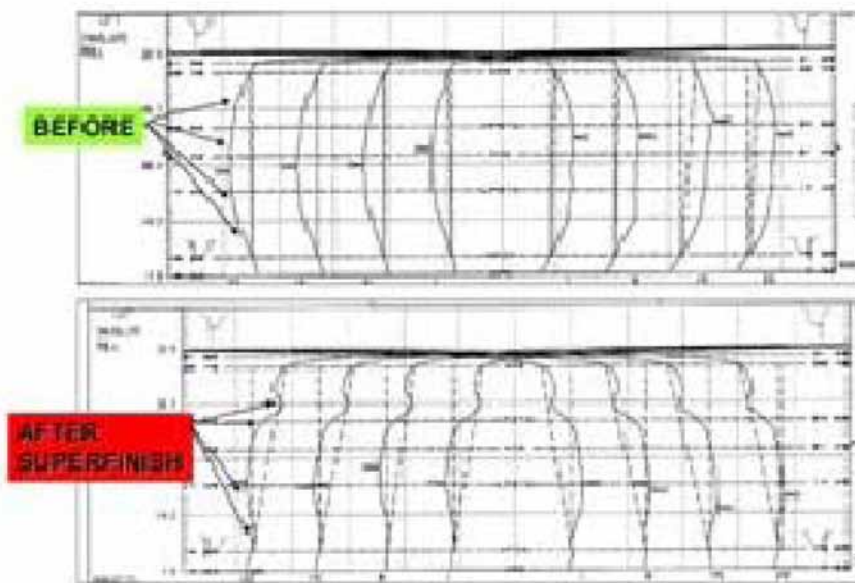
ISF process development: gear chart showing excessive tip stock removal.
